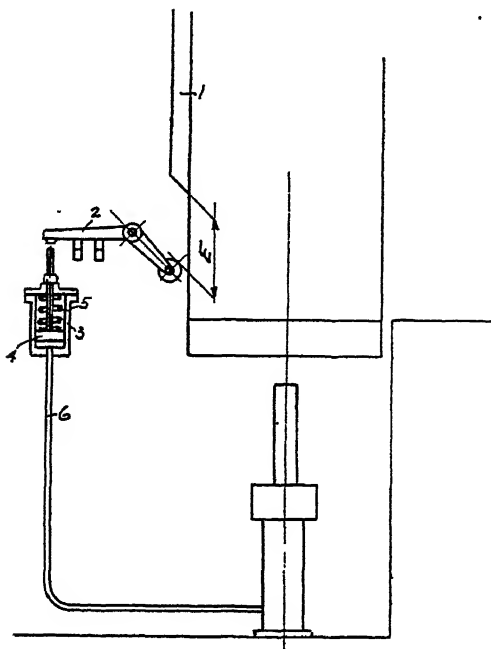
HYDRAULIC SPEED-RESPONSIVE DEVICE TO STOP MACHINE
